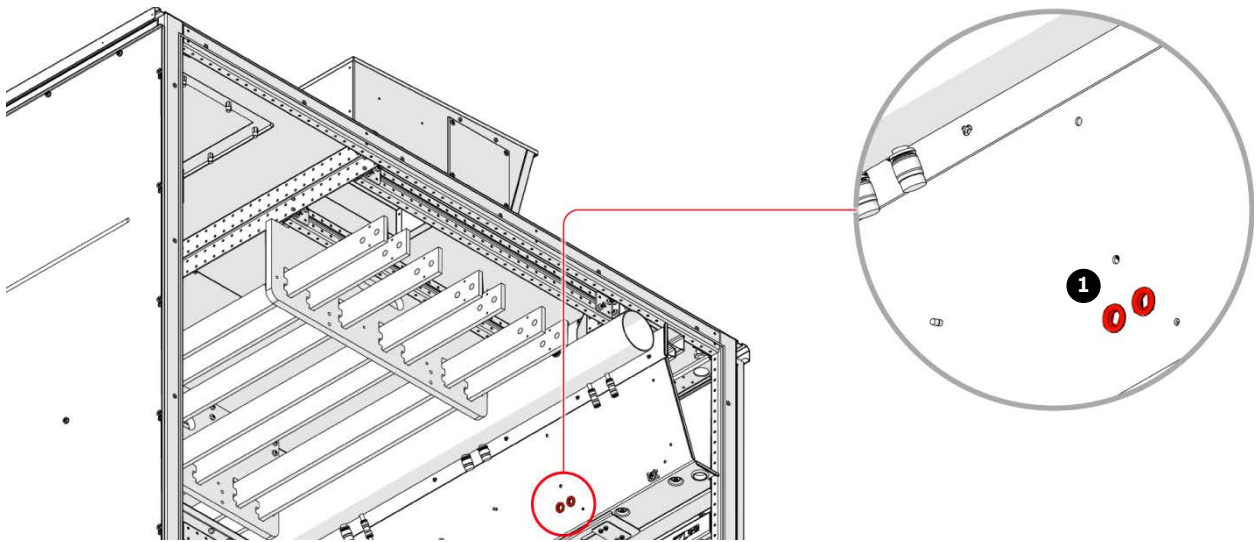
Cable duct openings (example with 1700 mm PCU)
